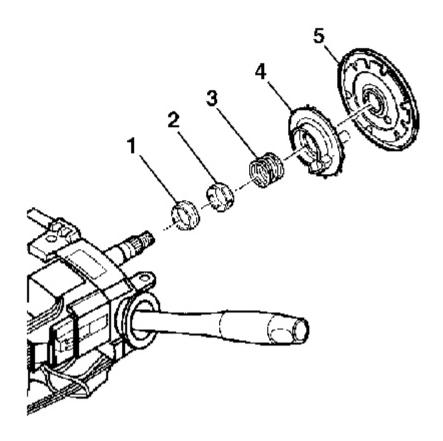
Removing Steering Shaft & Components Courtesy of GENERAL MOTORS CORP.
